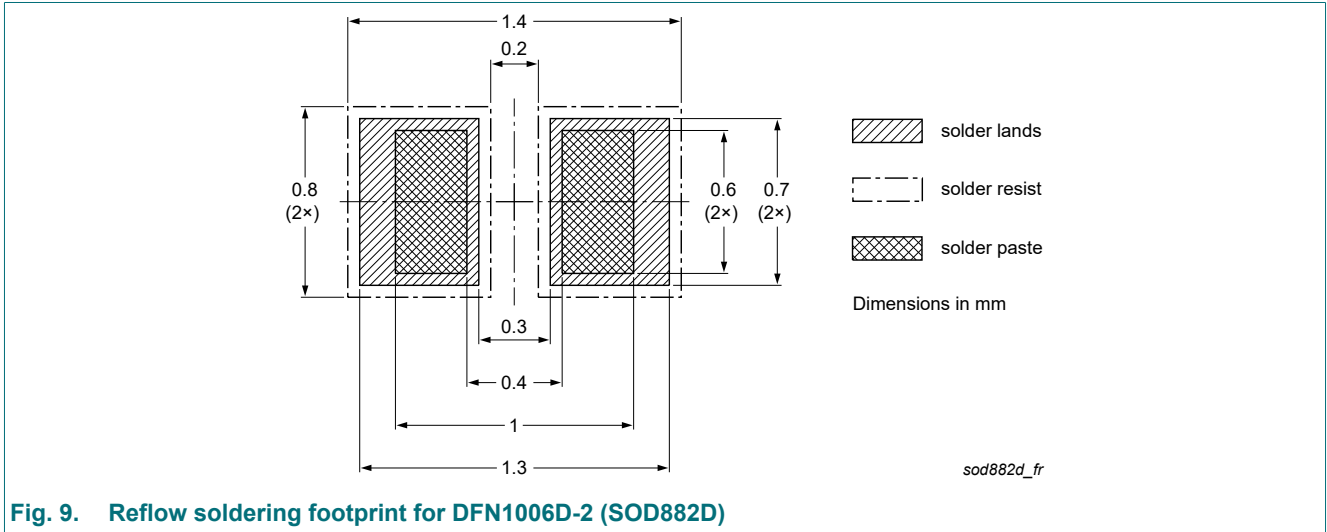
Reflow soldering footprint for DFN1006D-2 (SOD882D)
